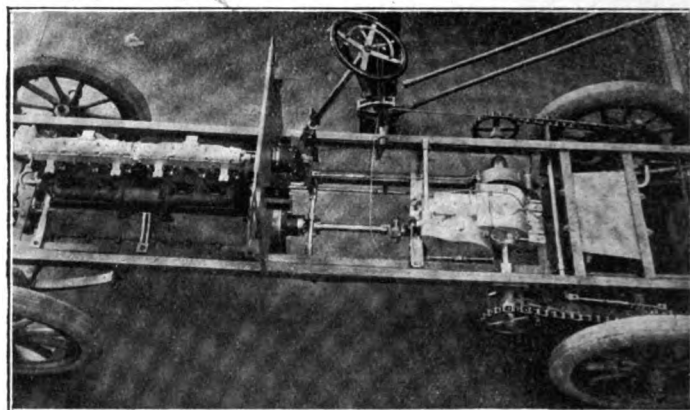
Chassis of Maudslay 40-h.p. Six-Cylinder Car.
